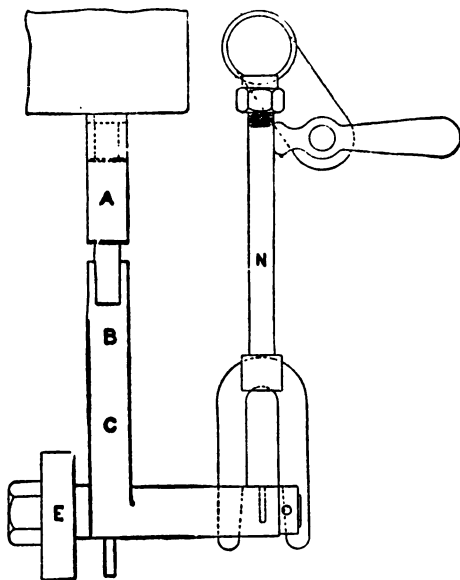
"Stockport" Gas Engine—Governing Arrangement.
